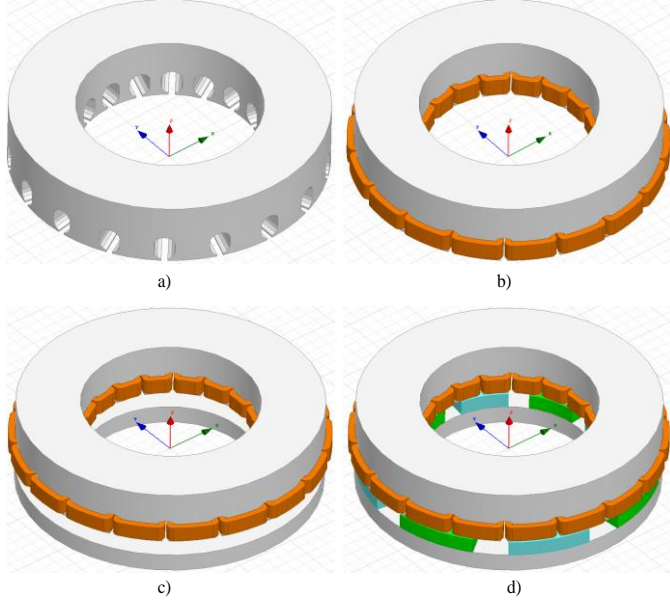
AFPMSM geometrical part; a) stator core b) coils c) rotor core d) PM
